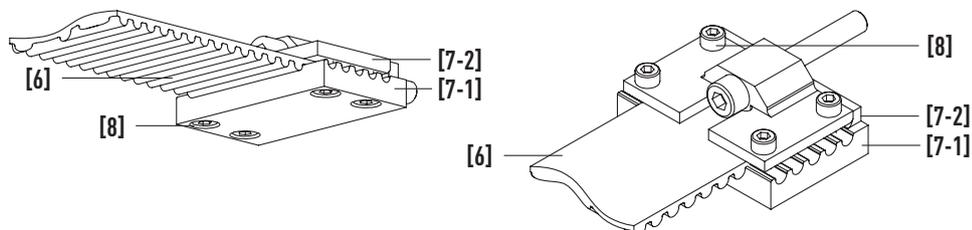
Installing the toothed belt in the belt tightener (left: HT150B, right: HT200B, HT250B)
